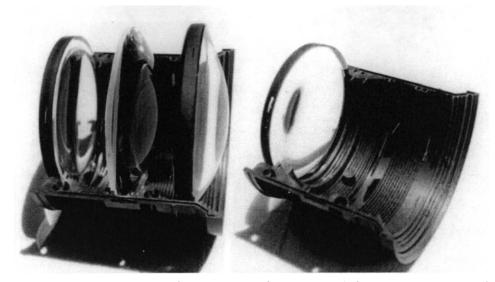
Photographs of the interior of the lens cell from the assembly of Fig. 4.41. (a) With all lenses in place and (b) with two or the lenses removed. Lens mounting features and stray light reducing grooves can be seen.
